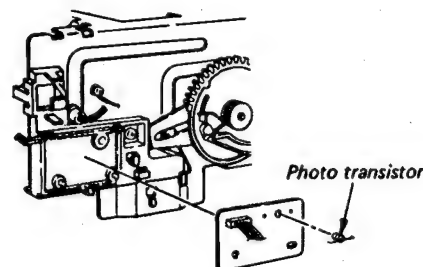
Replacement of photo transistor on FL P.C. board (L)
